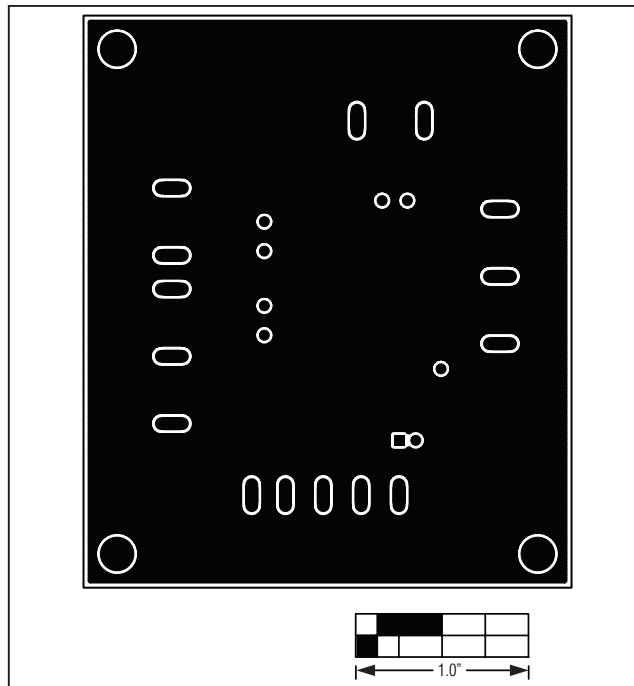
MAX17120 EV Kit PCB Layout—Solder Side
